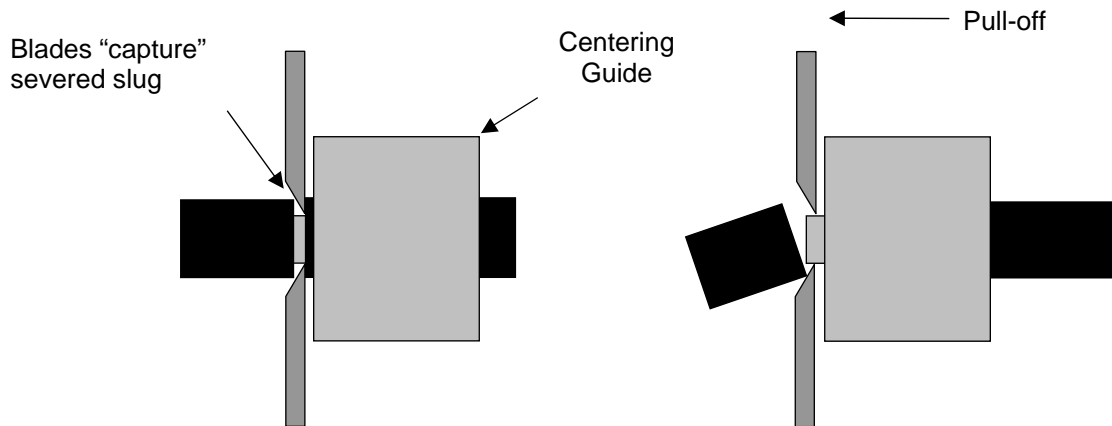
Rotary Stripper 2-Point Slug Removal Method
